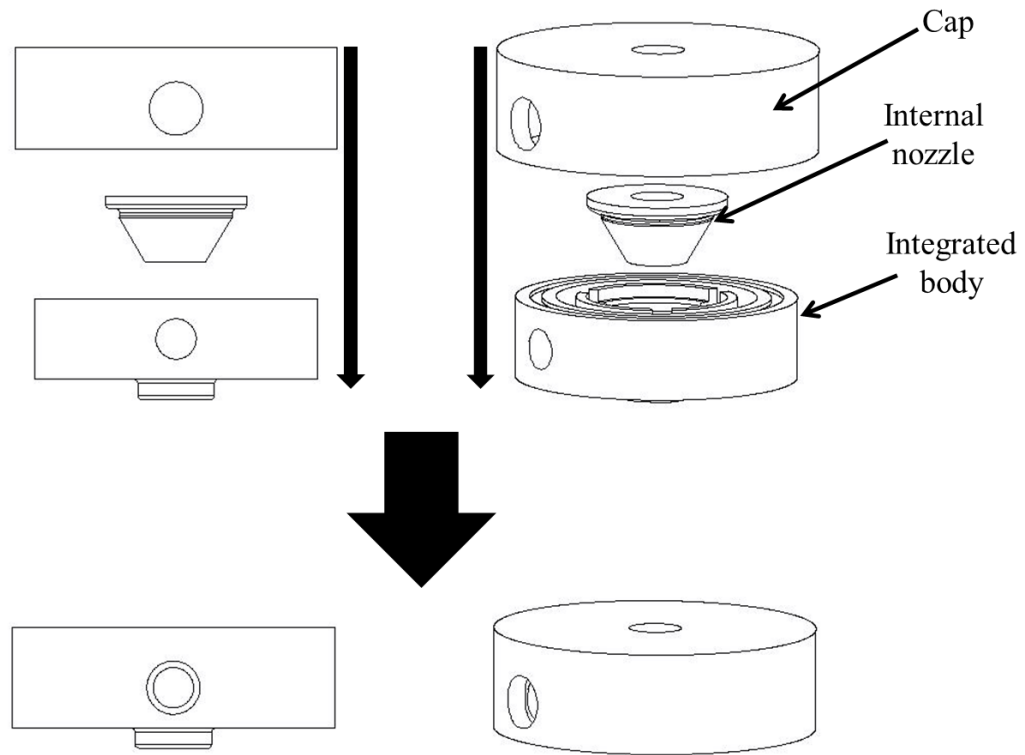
Exploded assembly sequence of the cryogenic shower nozzle
